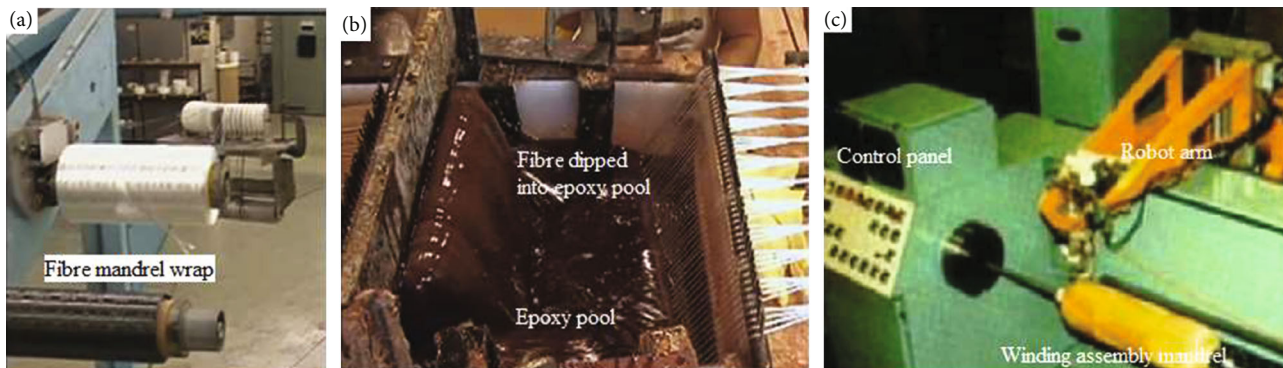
Actual fabrication setup of wet winding machine. (a) Fibres are placed in roving roller, (b) resin bath, and (c) filament-winding robot arm with a fabric mat.
